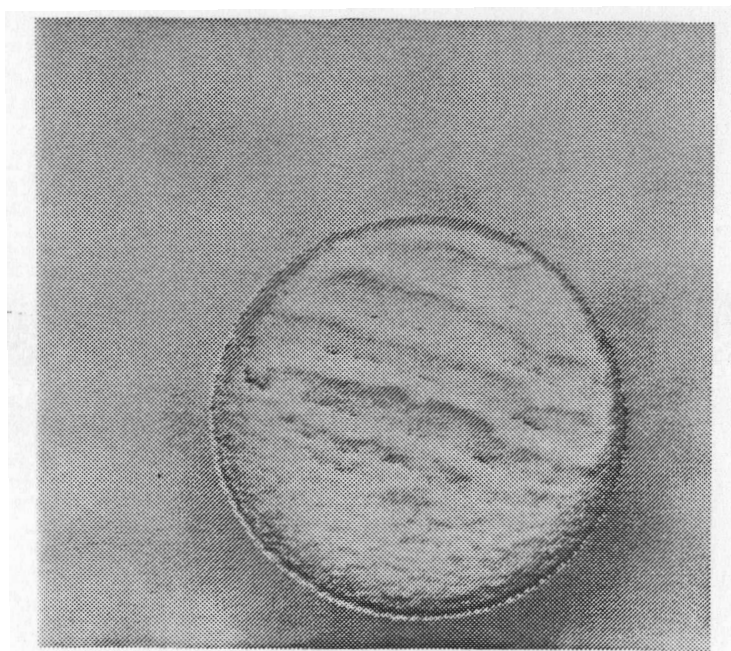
Fracture Surface of Sample No. 4. 36X.
